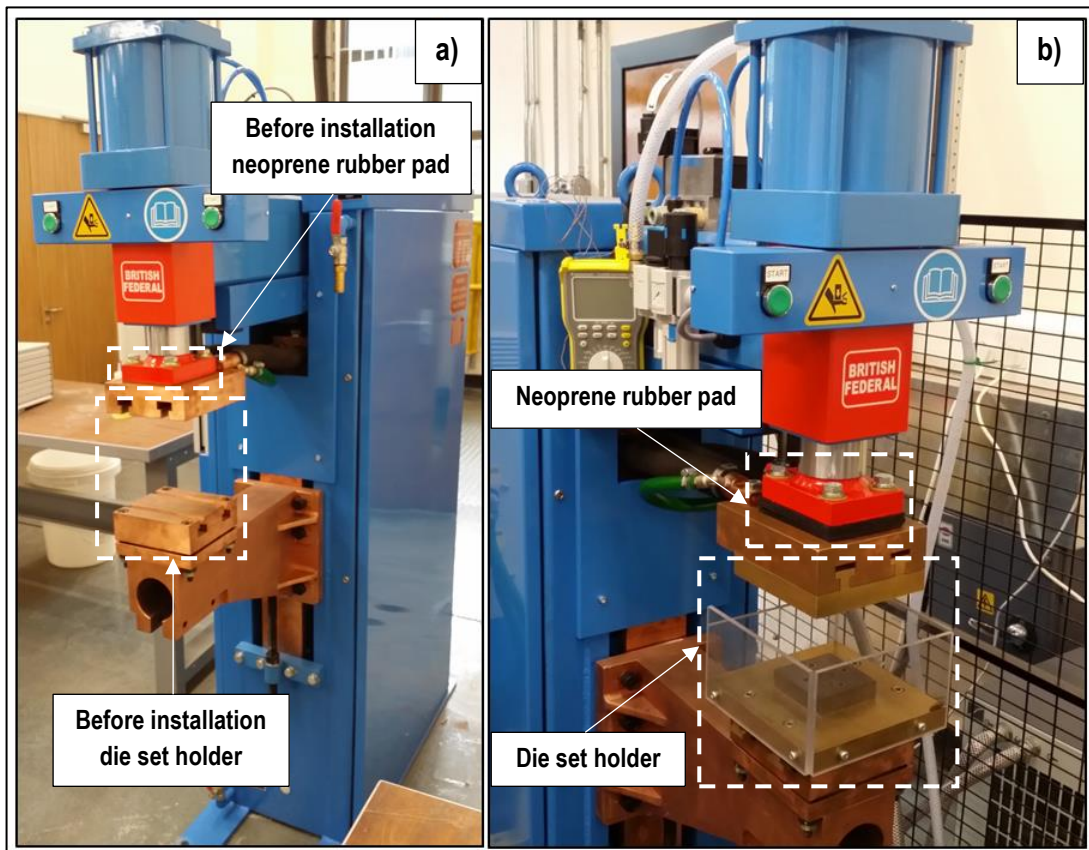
Comparison between (a) stock Projection Welding machine and (b) after complete installation of the tooling for Projection Welding machine.
